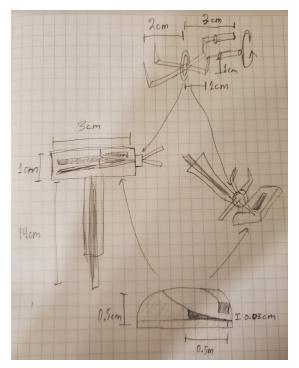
Drawing of the Potato Peeler with dimensions. Shown is the rotating forcep mechanism on the top with dimensions. In the middle are the bottom view (left) and the top-front view (right) of the whole design with dimensions. The bottom shows the blade portion of the device with the guard and the space where the loose skin will pass through. Dimensions of the blade portion are also shown.
